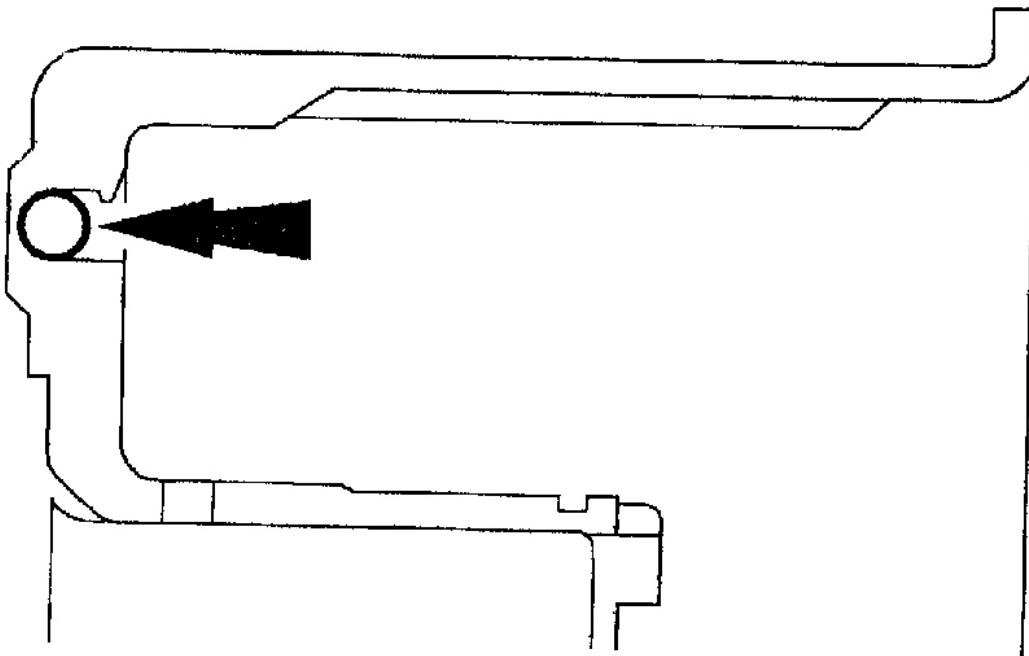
Installing Direct Clutch Piston Inner & Outer Seals
